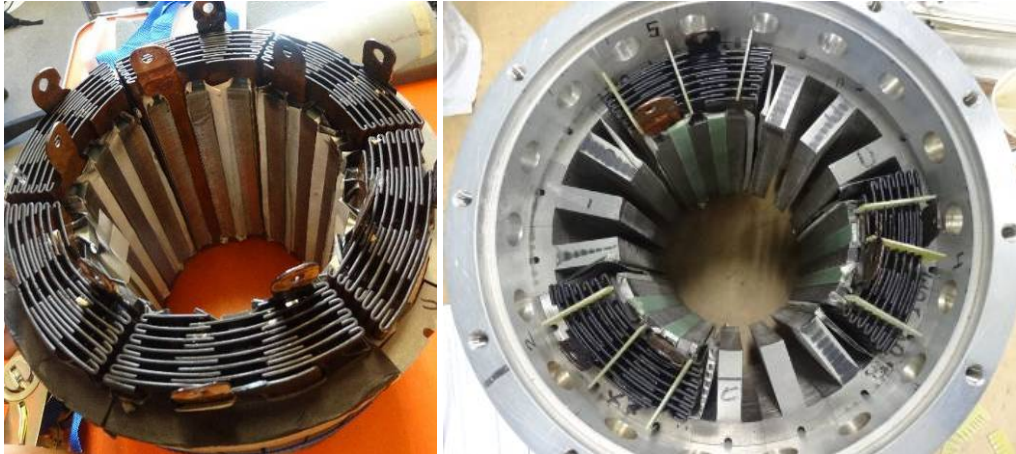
Stator assembly during the mounting tests (left) and after the final mounting (right)
